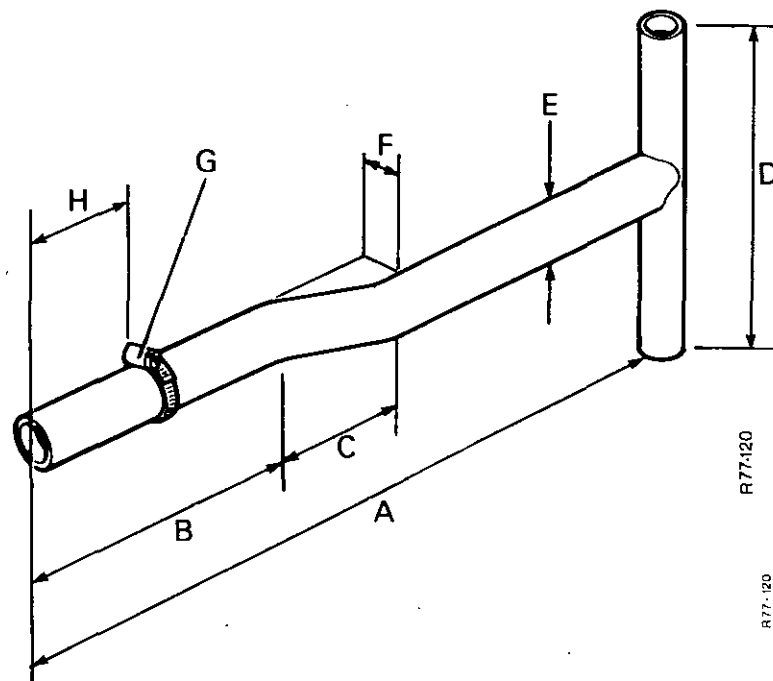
TOOL FOR INSTALLING DIFFERENTIAL LOCK SLEEVE
